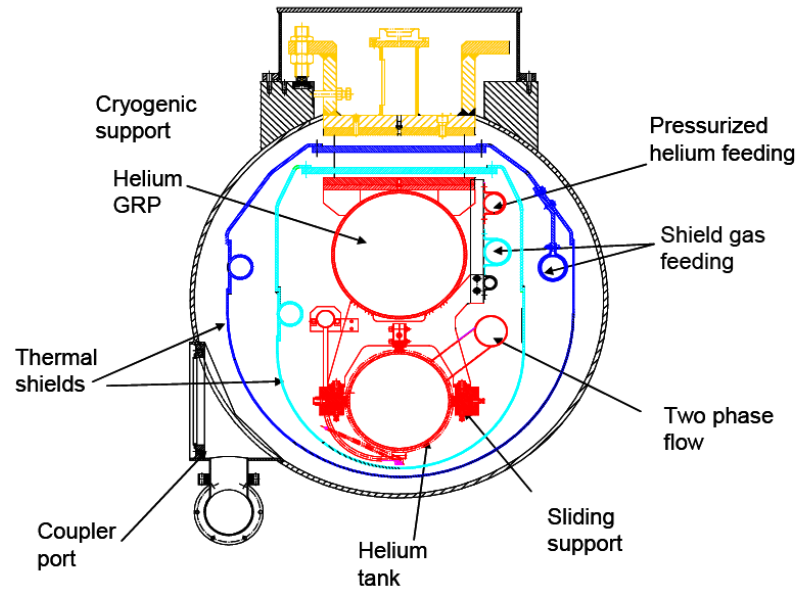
cross section view of a TTF cryomodule [12]
